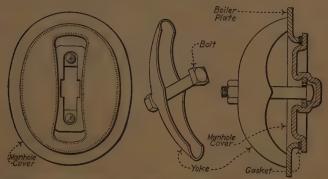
Pressed-steel manhole cover and assembly to boiler plate.
